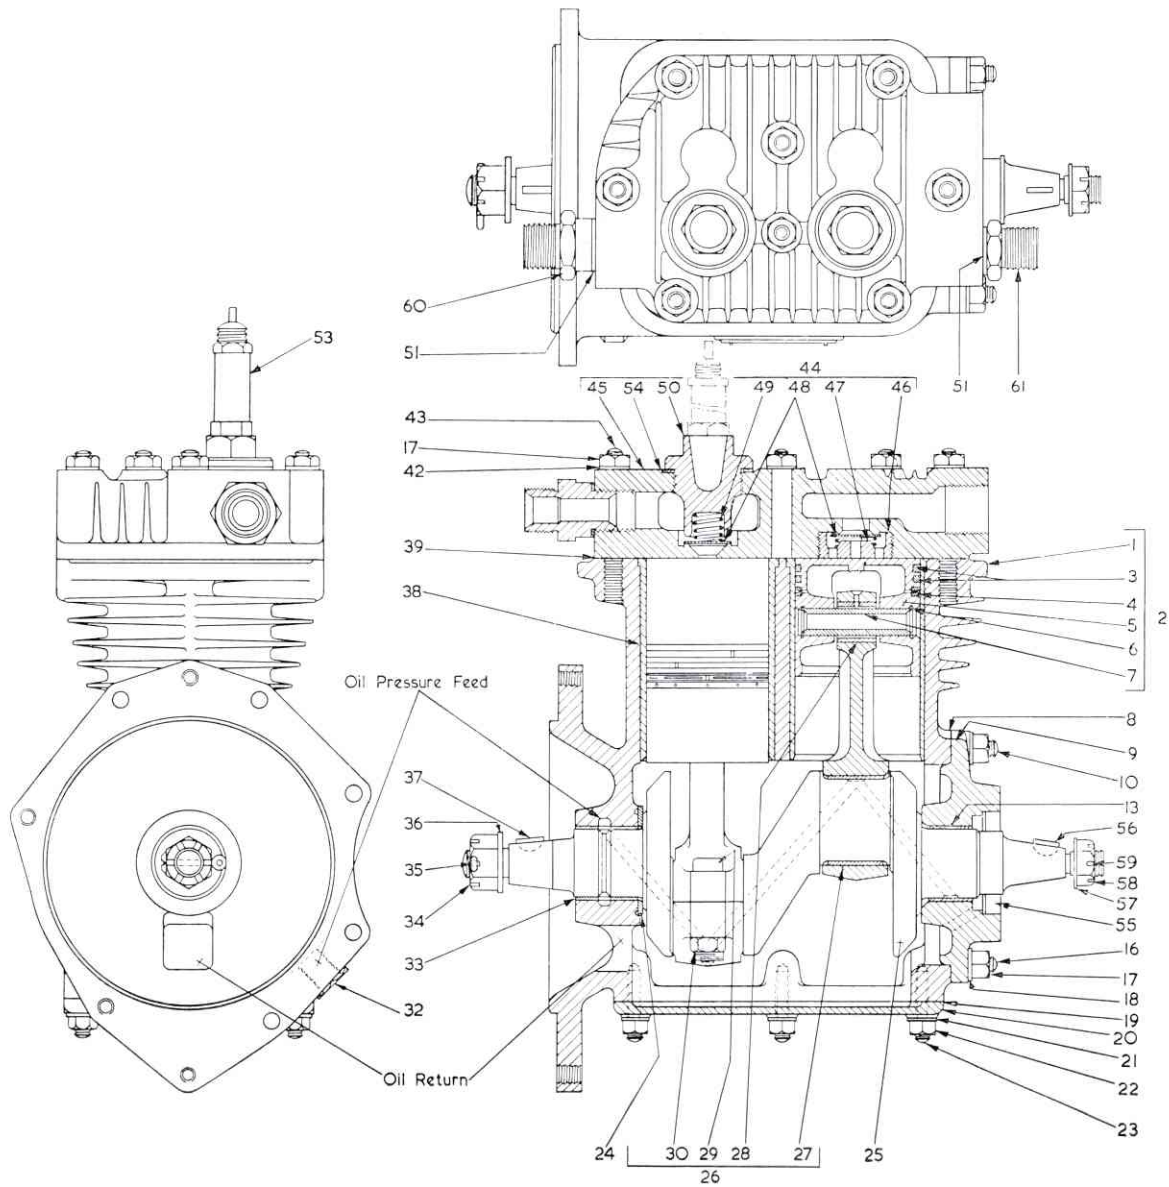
SECTIONS THROUGH THE WESTINGHOUSE TYPE E.IIV COMPRESSOR
